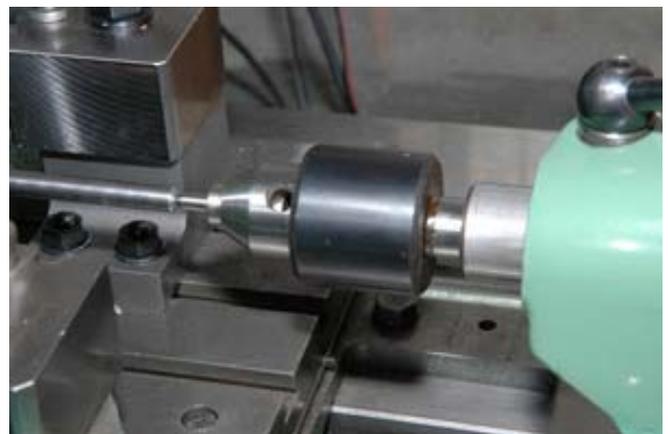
You Cannot Use a Thread Dial Indicator
